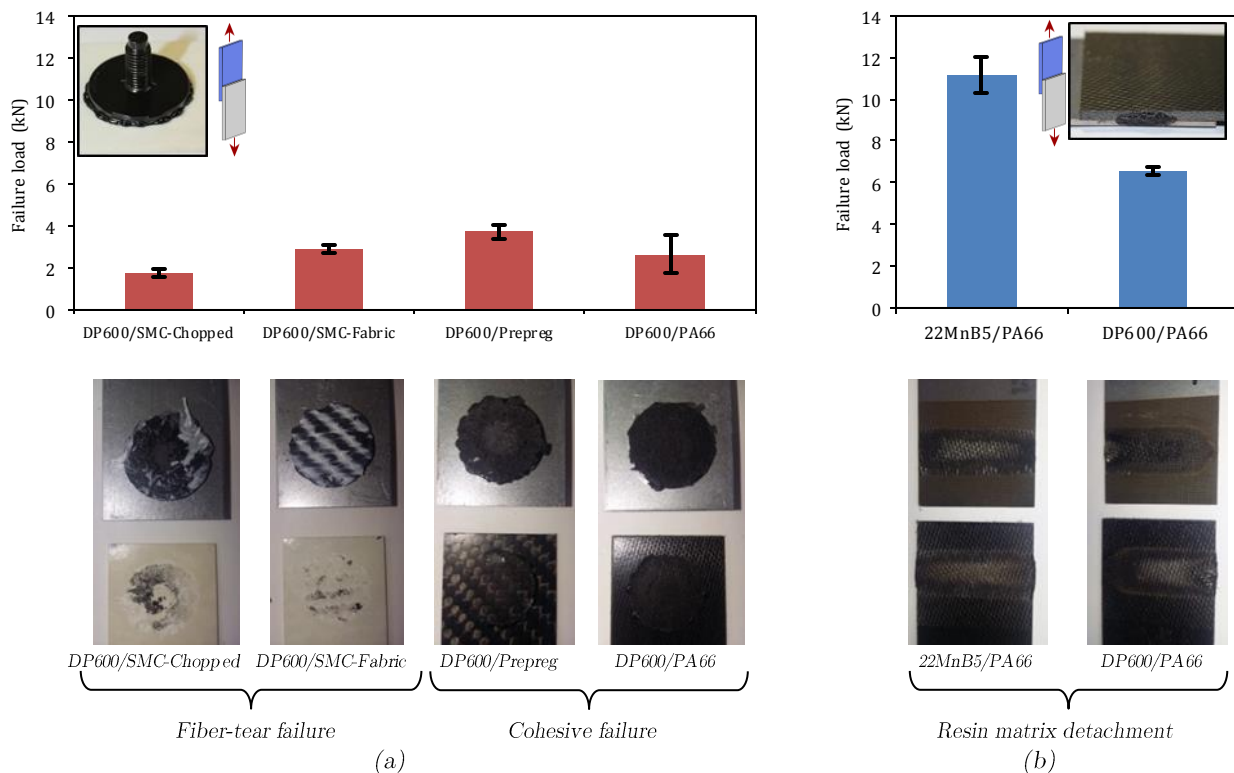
Failure load and failure modes of stud bonding specimens (a) and laser welding specimens (b) in lap-shear test.
